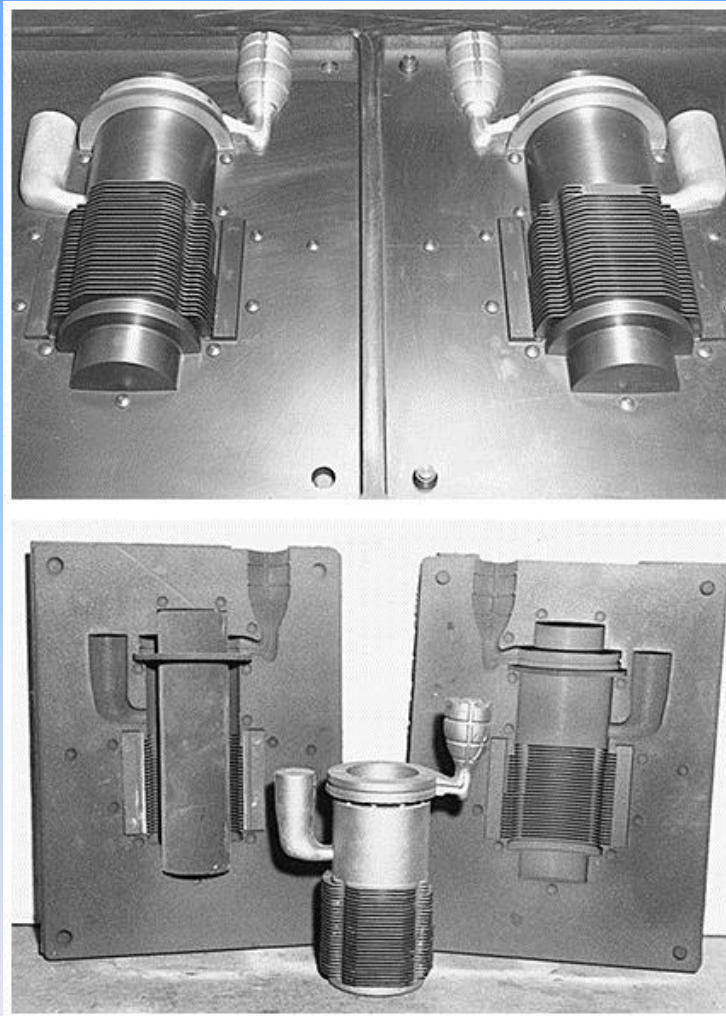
(Top) Two halves of a shell-mold pattern. (Bottom) The two shells before clamping, and the final shell-mold casting with attached pouring basin, runner, and riser. (Courtesy of Shalco Systems, Lansing, MI.)
